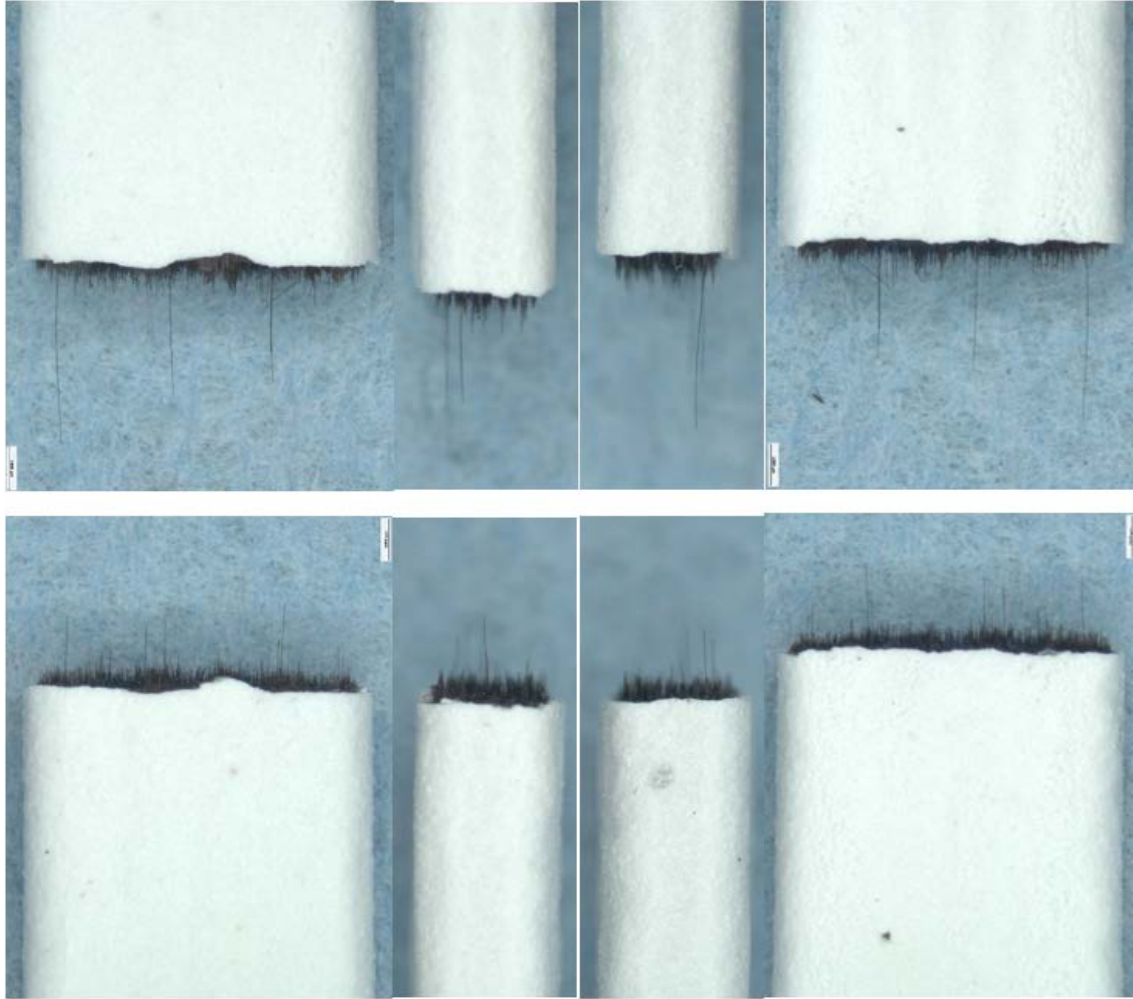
Fracture surfaces of specimen P15006-13, tested in fatigue at 1200°C in air.
